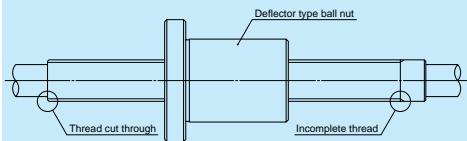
Shaft end of a deflector recirculation system ball screw
